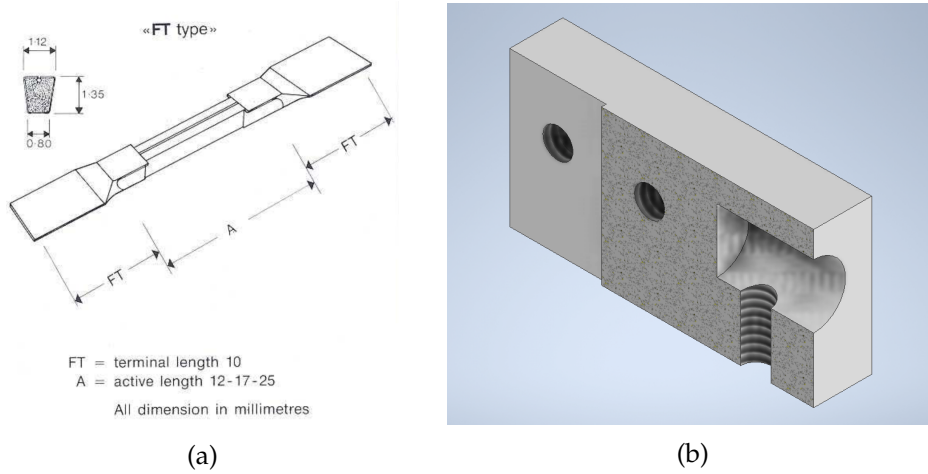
(a) Drawings of the Cs dispenser. We are using one with $A = 12$ mm. (b) CAD of the dispenser mount in half view.
